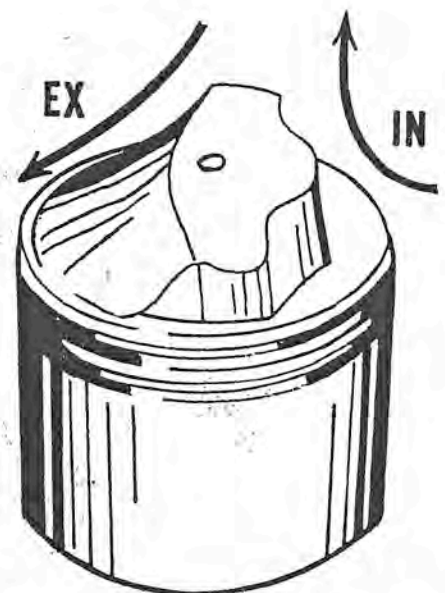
Baffle on top of piston head is designed to direct the flow of incoming mixture for proper scavenging. Pistons must be installed as shown with relation to cylinder ports.
